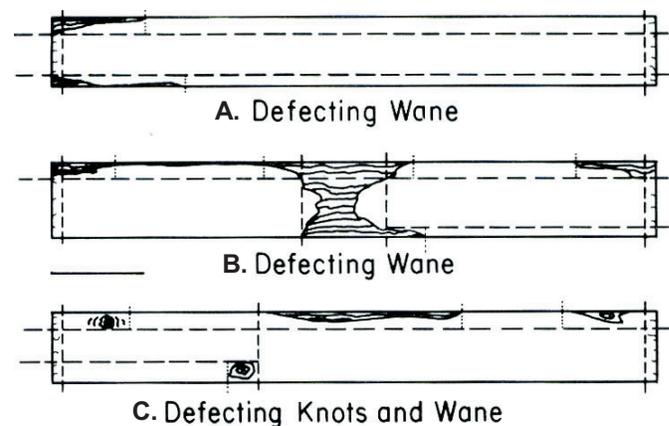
Removal of wane and knots using crosscuts, rips, and salvage cuts; full-width dashed lines show the first crosscut, horizontal dashed lines show rip cuts performed on the shorter pieces, light vertical lines show chop cuts made on the already crosscut and ripped strips.
